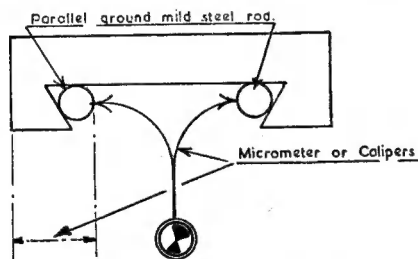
Checking female dovetail slide and cross-slide sides for parallel
